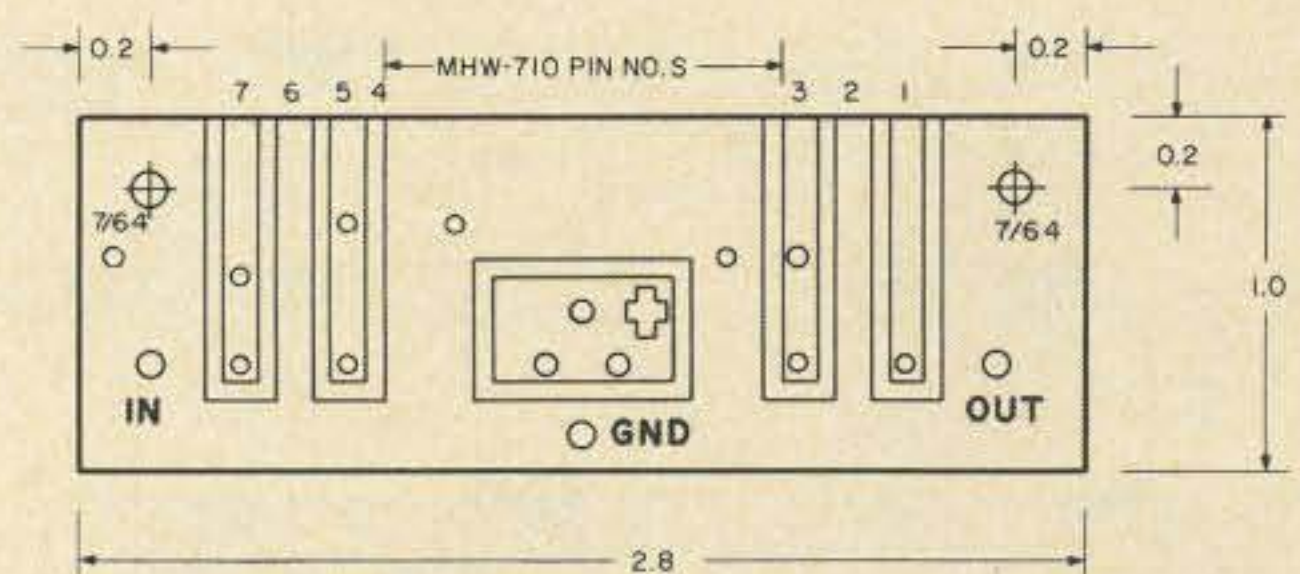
10 Watt ATV amplifier PC board, foil side. All dimensions in inches. Board is glass.
